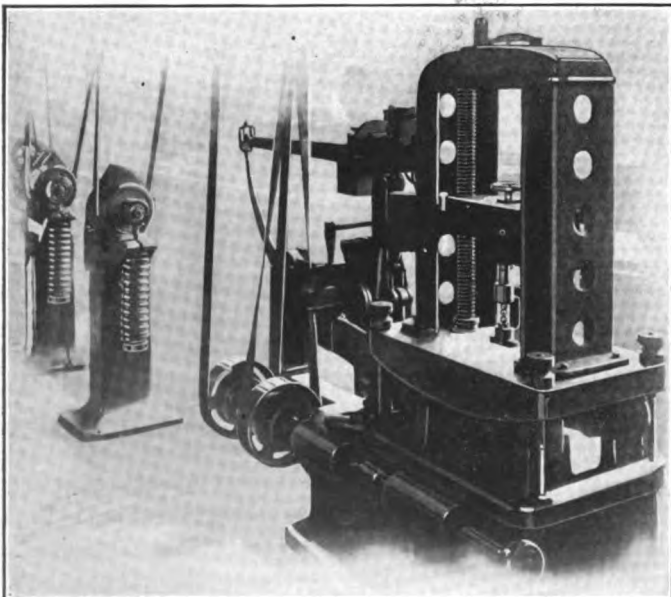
Riehle Testing Machine Used for Determining Strength of Materials and Finished Ball Bearing Parts.
